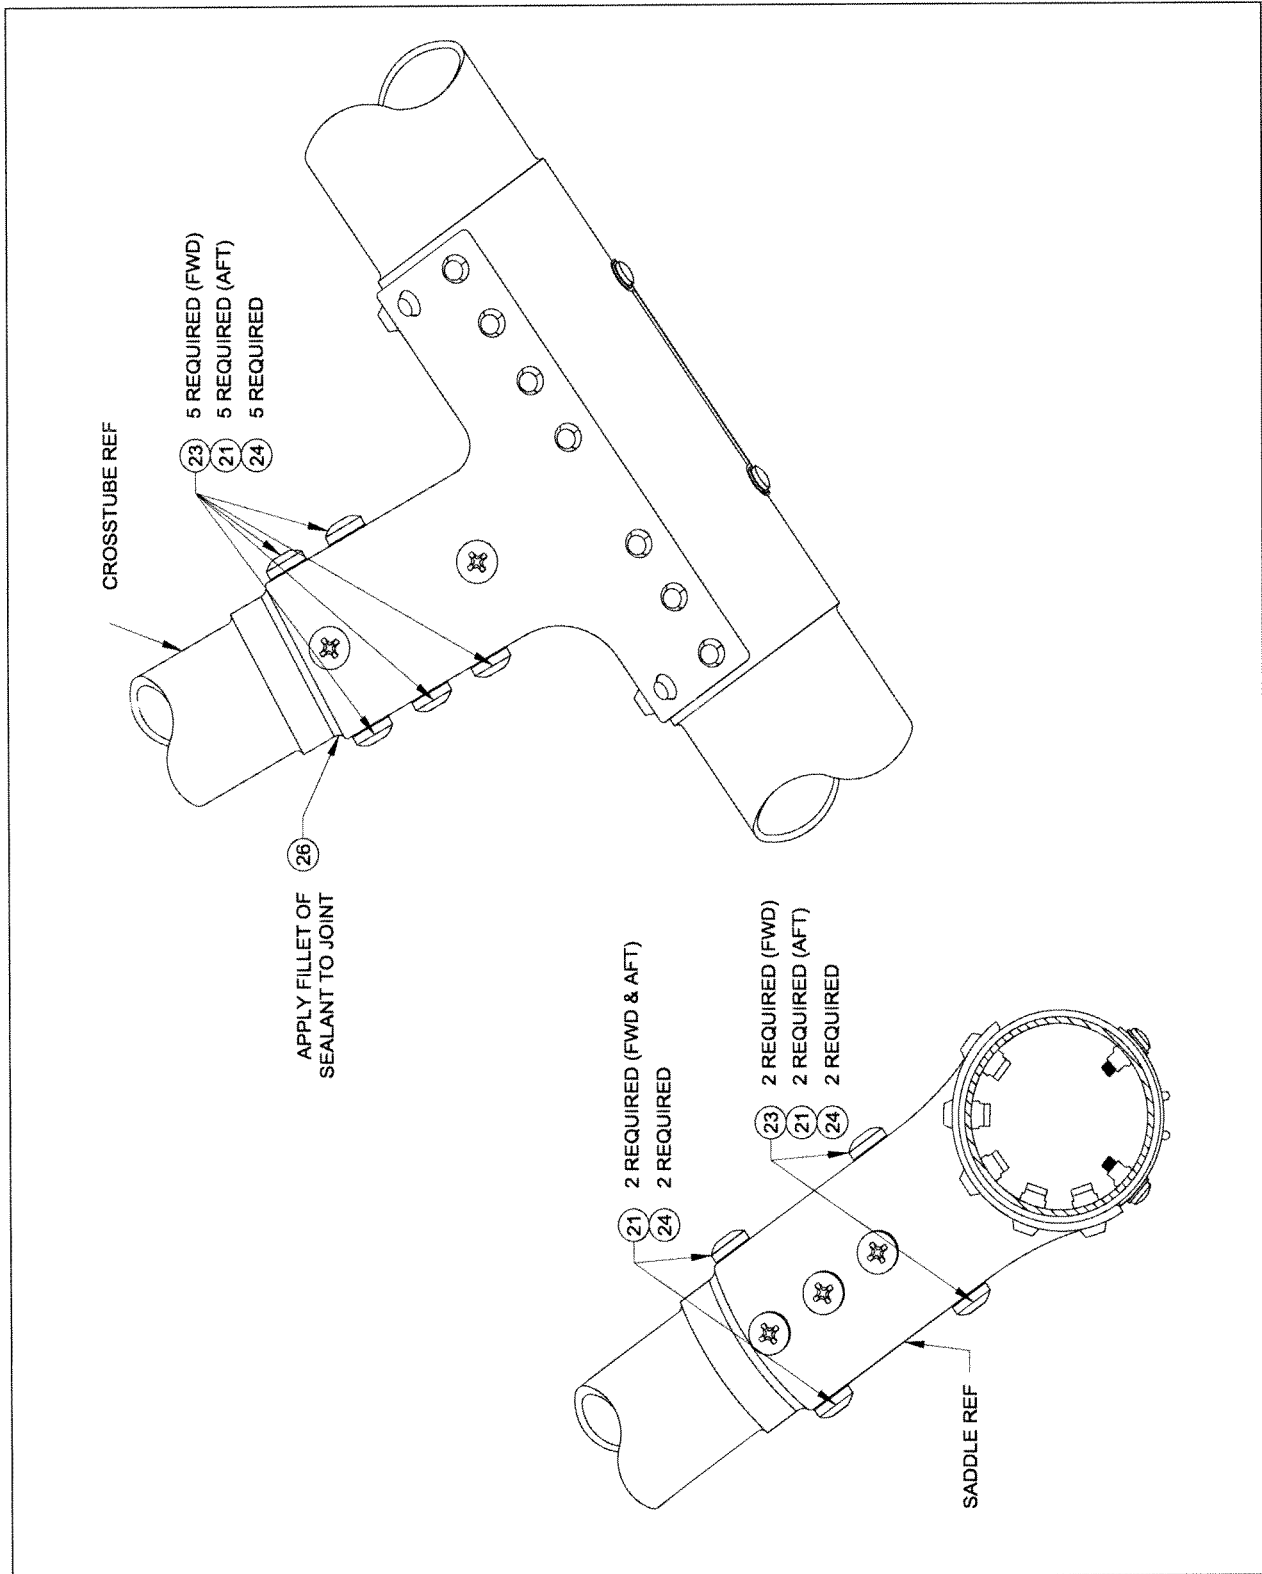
FORWARD AND AFT CROSSTUBE ATTACHMENT TO SKID TUBES
